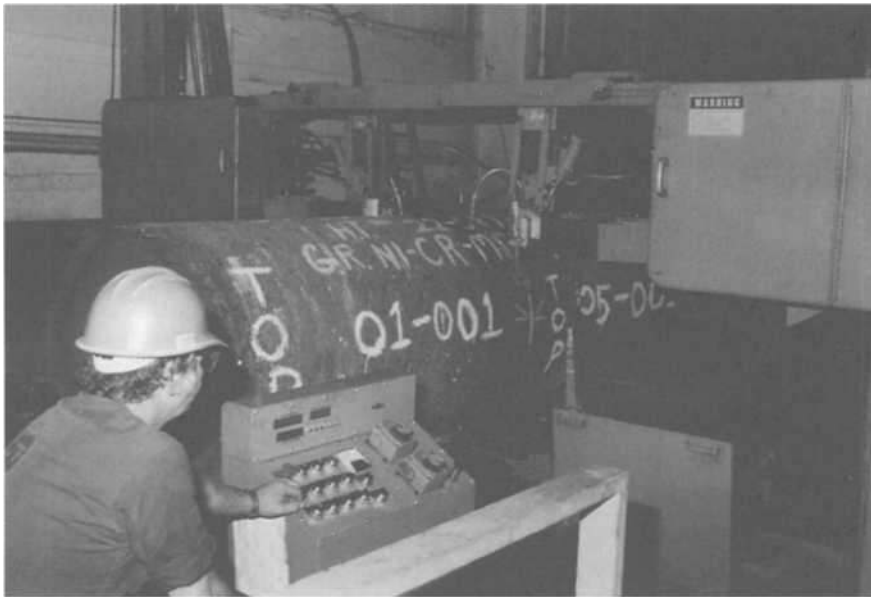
Large bandsaw used during rough machining operations on forgings.
